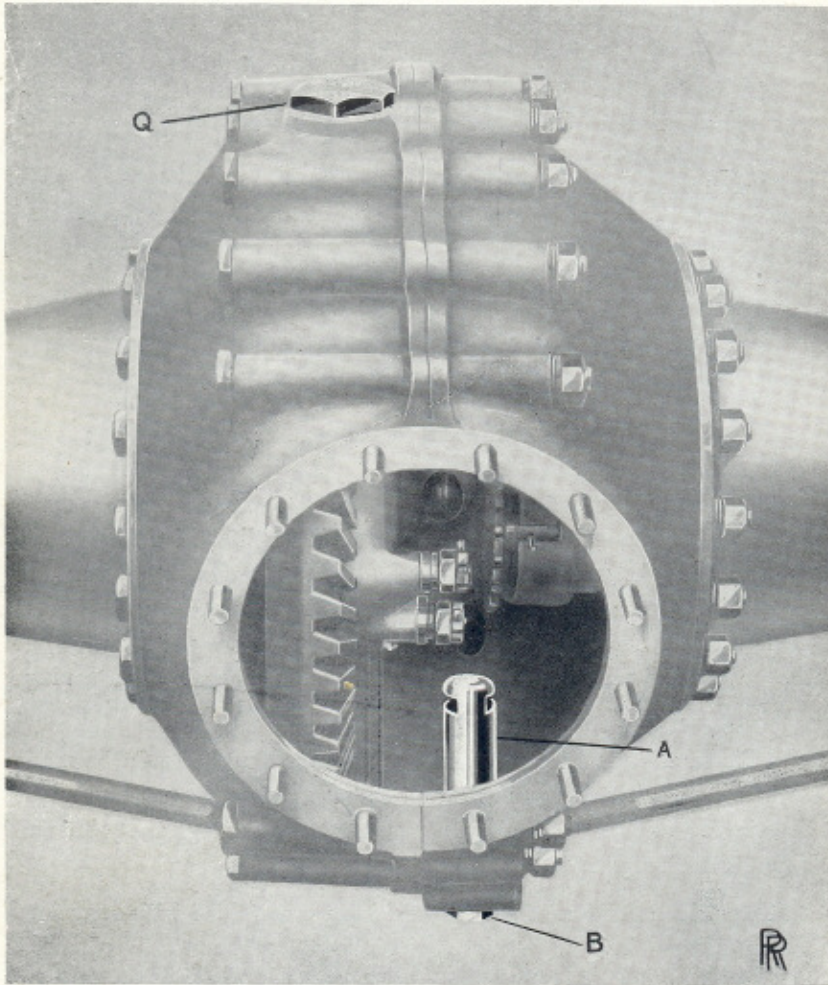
OIL PLUGS IN REAR AXLE CASING.
